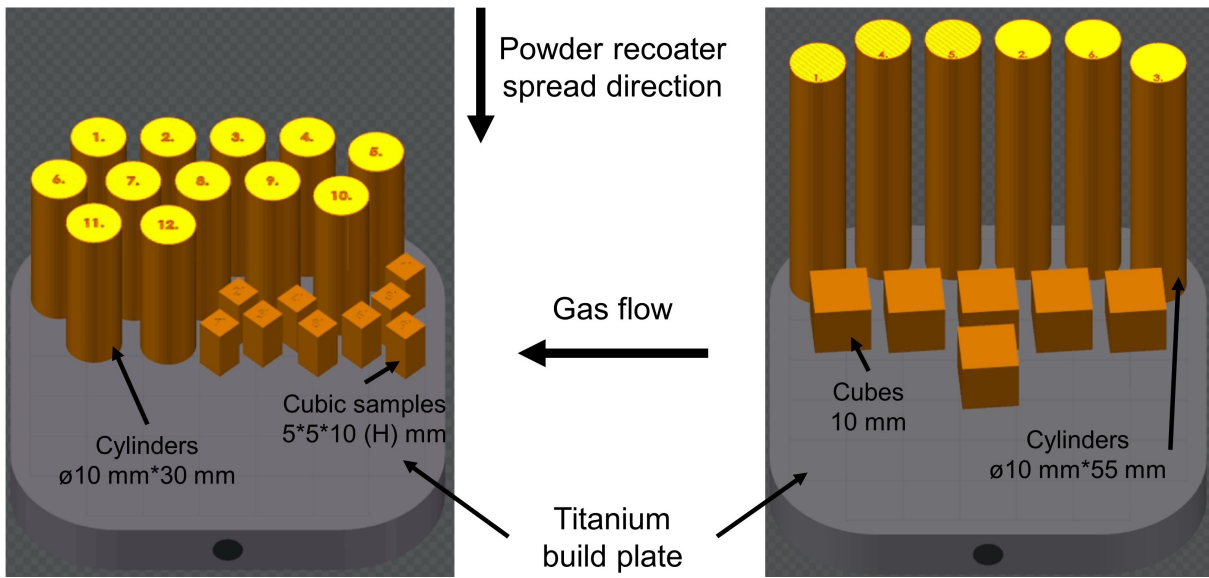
Illustration of the build plate layout on the reduced build volume of the modulated beam LPBF for the manufactured Ti-6242Si samples for Print 1 (left) and Print 2 (right).
